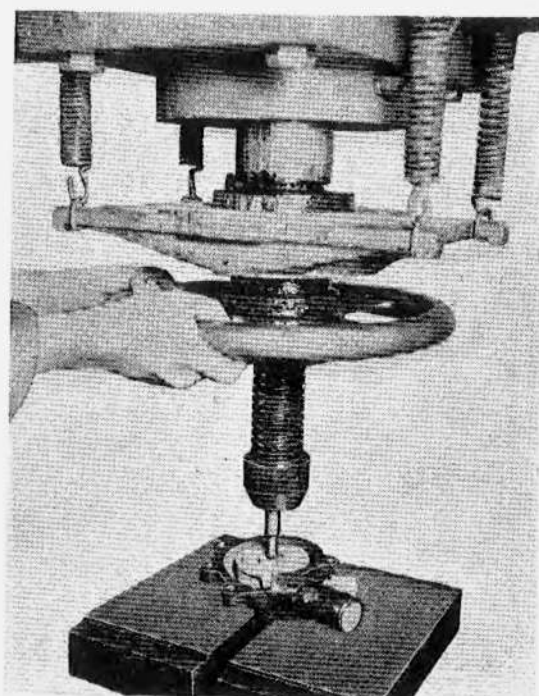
Removing Water Pump Shaft and Bearing Assembly
